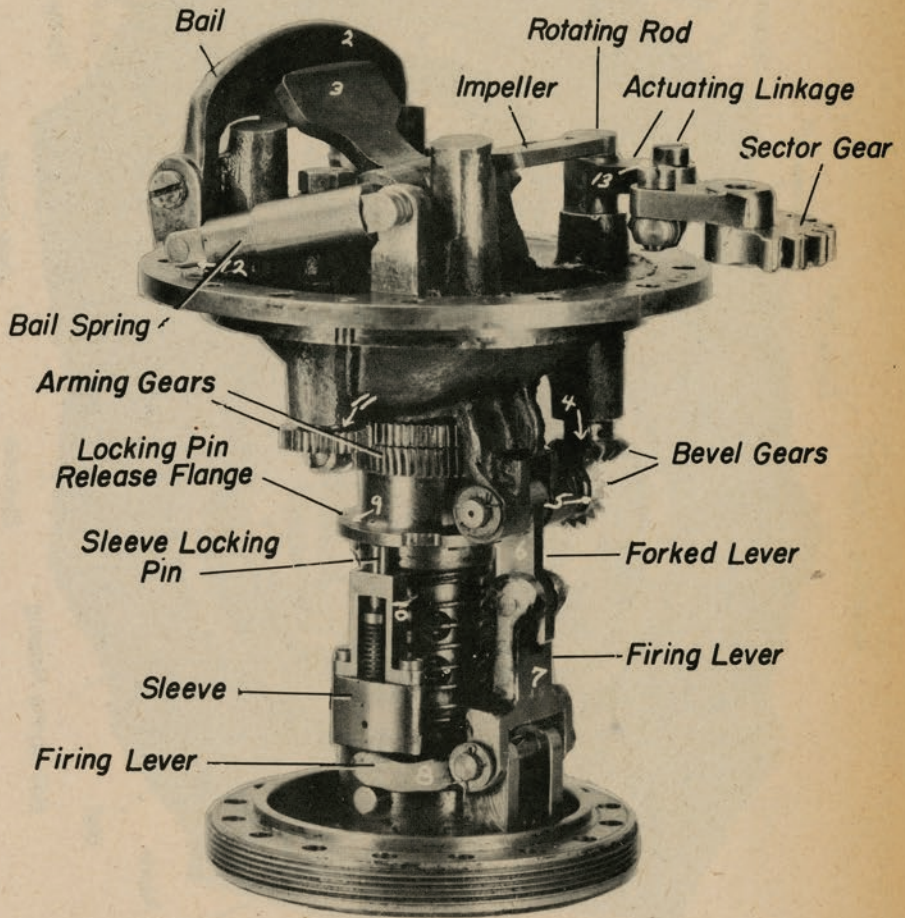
Type 3 Exploder, Arming and Firing Assembly
